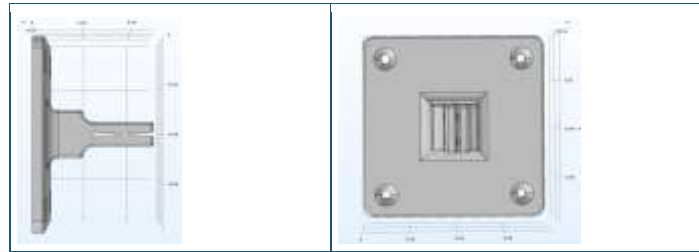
Isometric and different plane views of clamp V1.0 design for 3D printing
